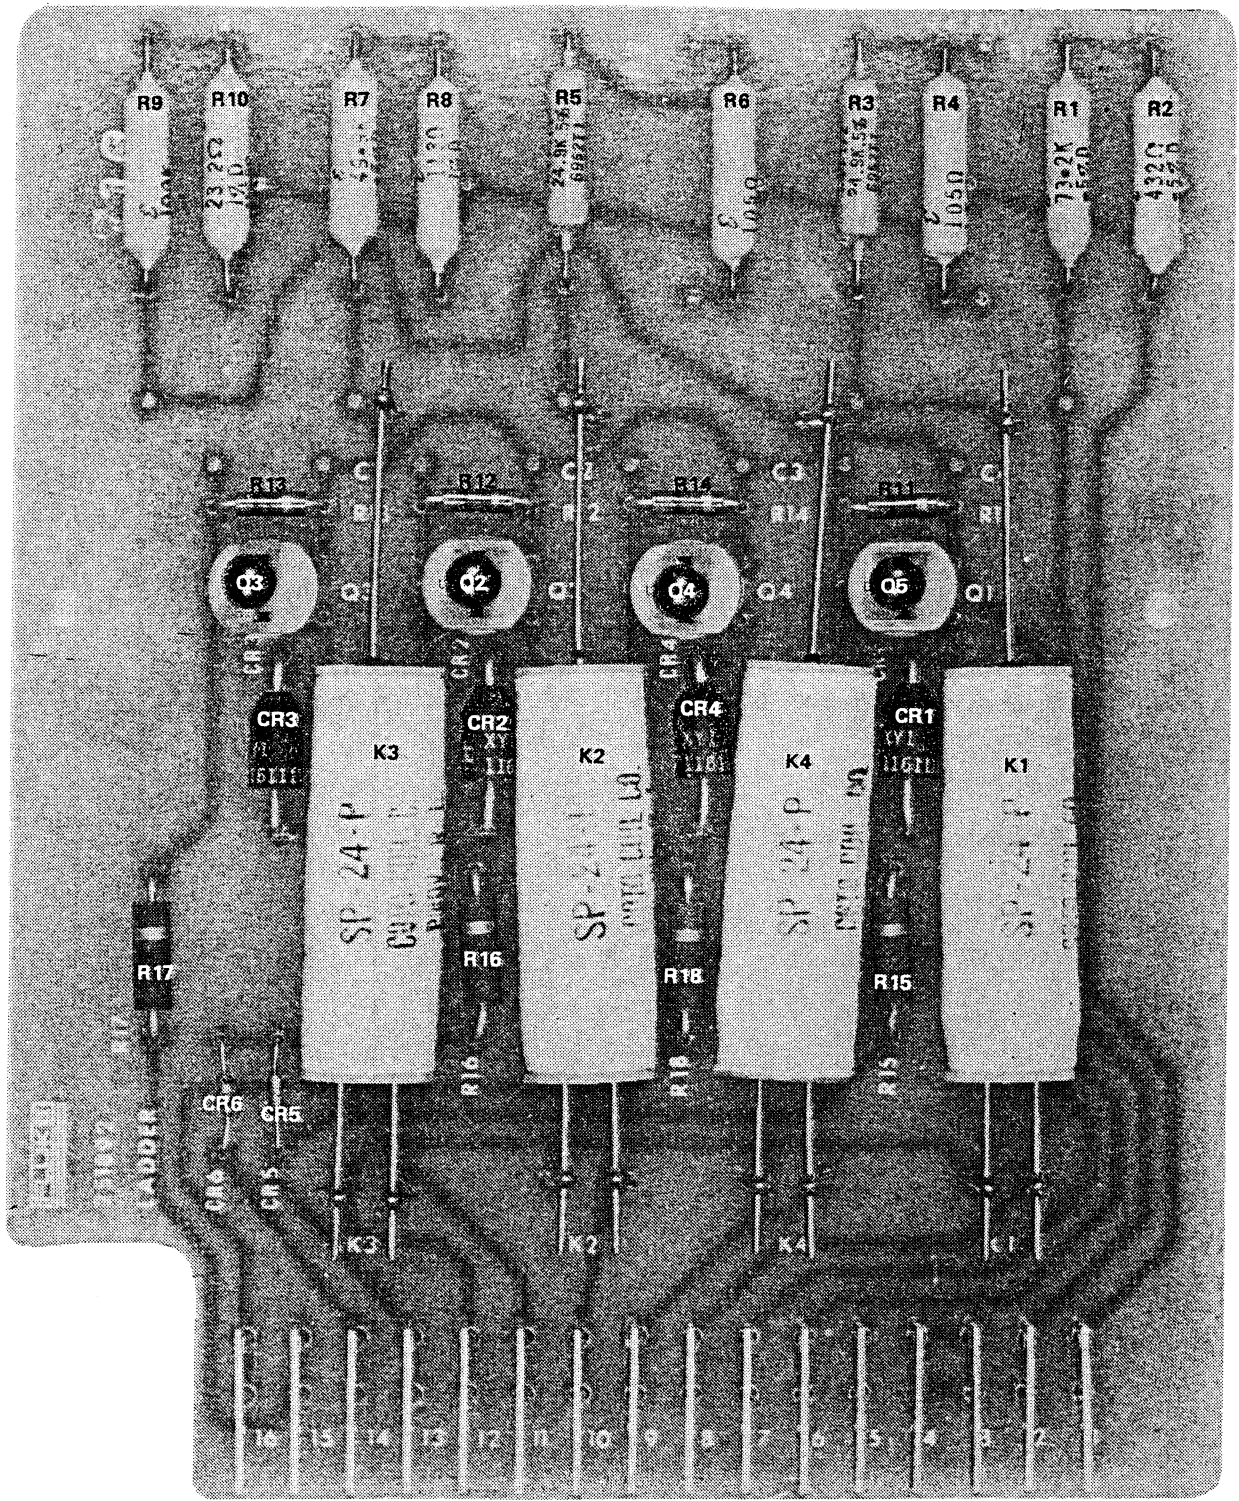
LADDER DRIVER NO. 5, NO. 6, AND NO. 7 ASSEMBLY
